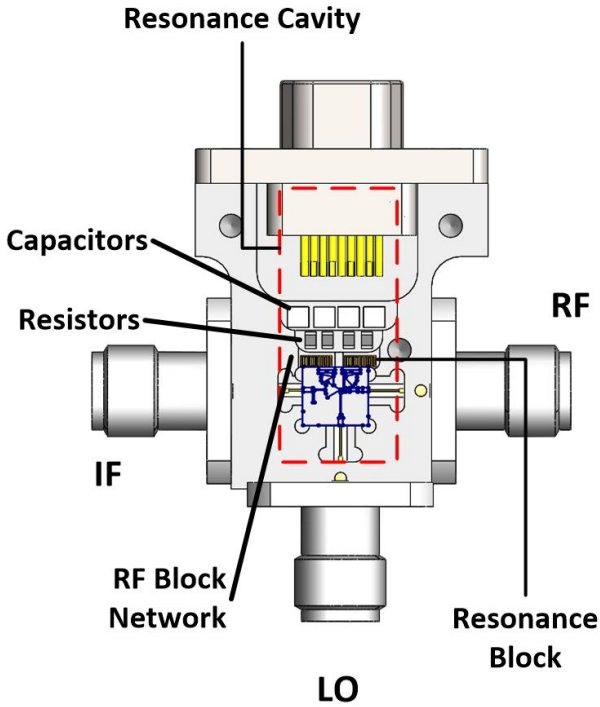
Drawing of the packaged HTS Josephson mixer module.
